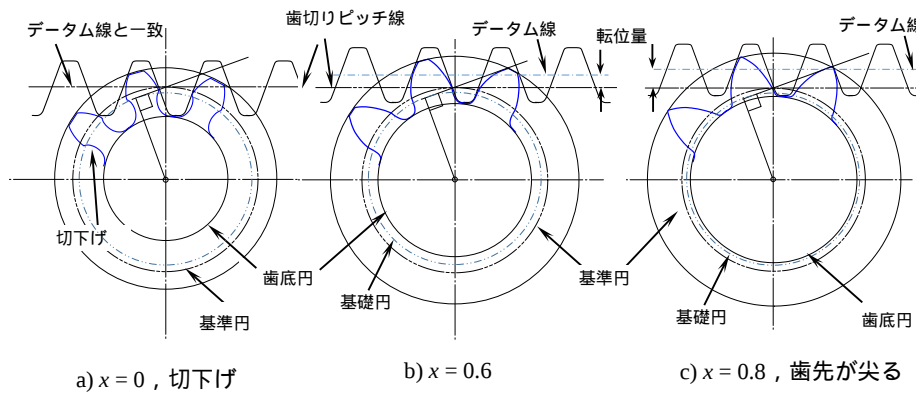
A group of profile shifted gears made with the same rack-type tool [1] (This diagram is by Haruo Houjoh)
